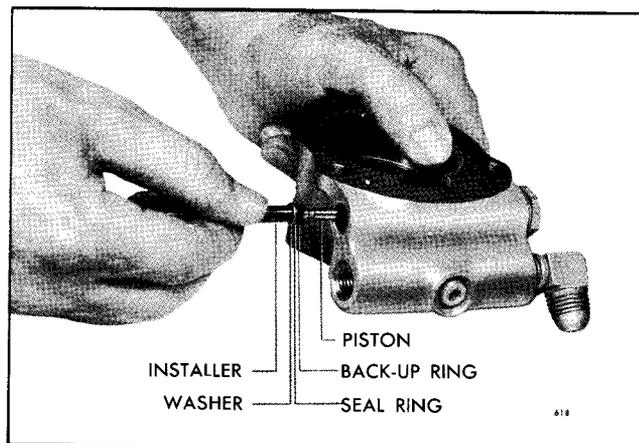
Installing Pressure Relief Piston, Back-Up Ring, Seal Ring and Washer in Pump Body with Installer J 7192
